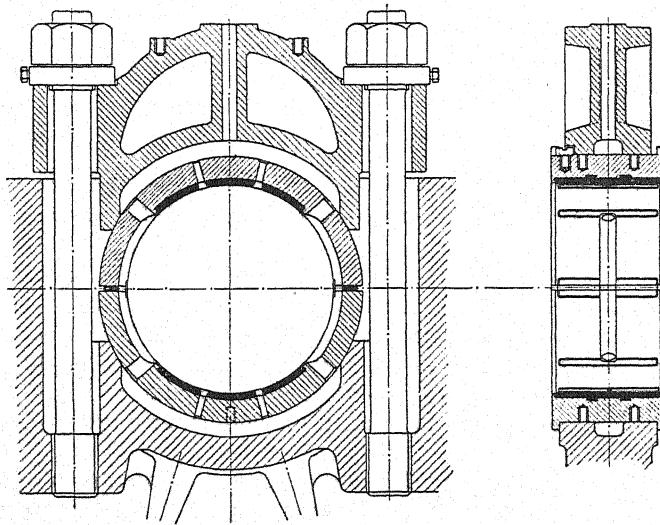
Main Bearing (Burmeister and Wain Engine)
